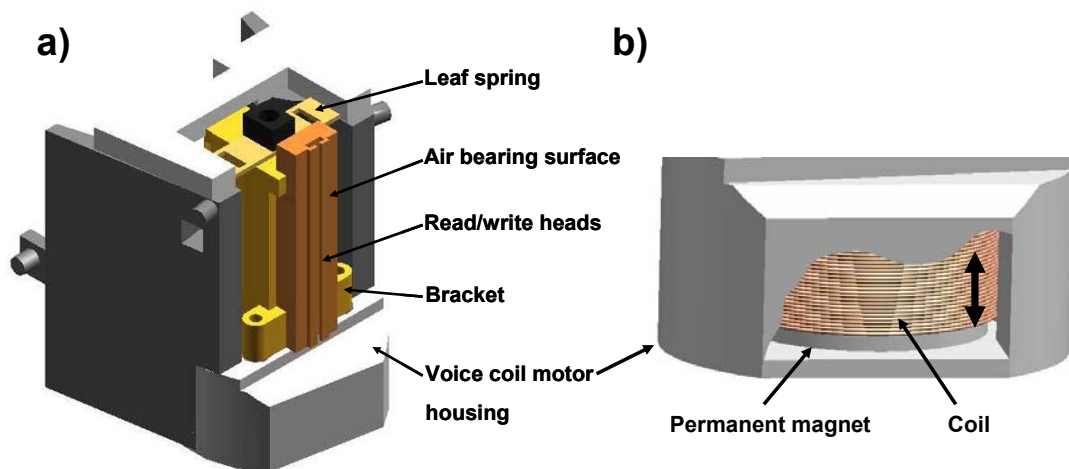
a) Typical tape head and b) schematic of a voice coil motor (VCM)
